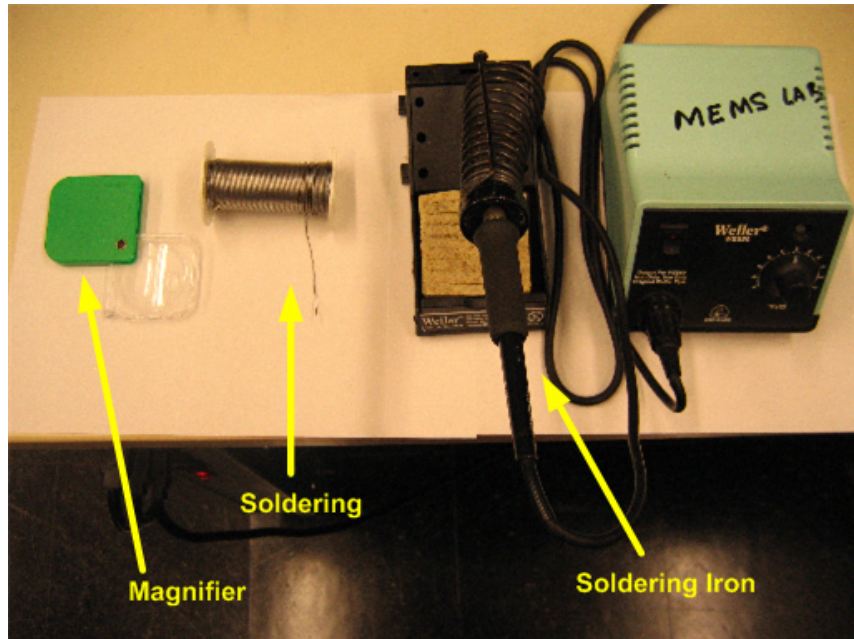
The soldering equipment for bonding the control wires on top of the PCB.
